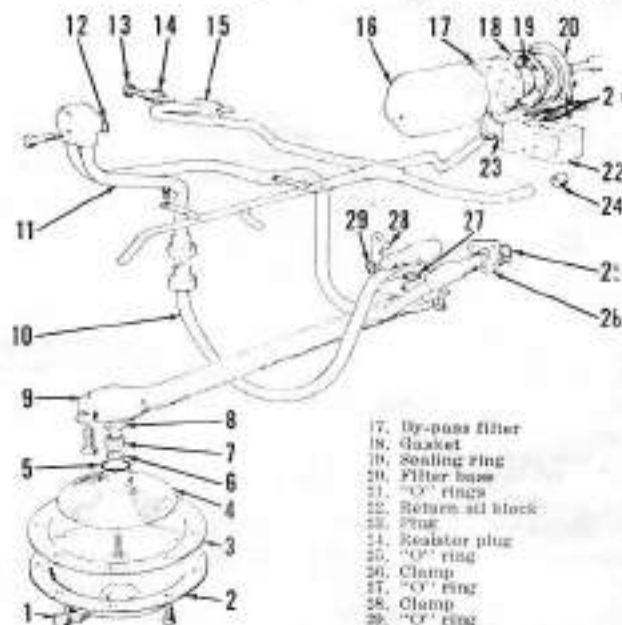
Exploded view of hydraulic lines and filters for early model 770. By-pass filter mounting block (22) was introduced to provide a return port for external hydraulic unit return oil and may be installed on earlier units where needed. Refer to Fig. 212 for model 770 and model 780 using full flow suction filter element instead of by-pass filter (16 to 20).
